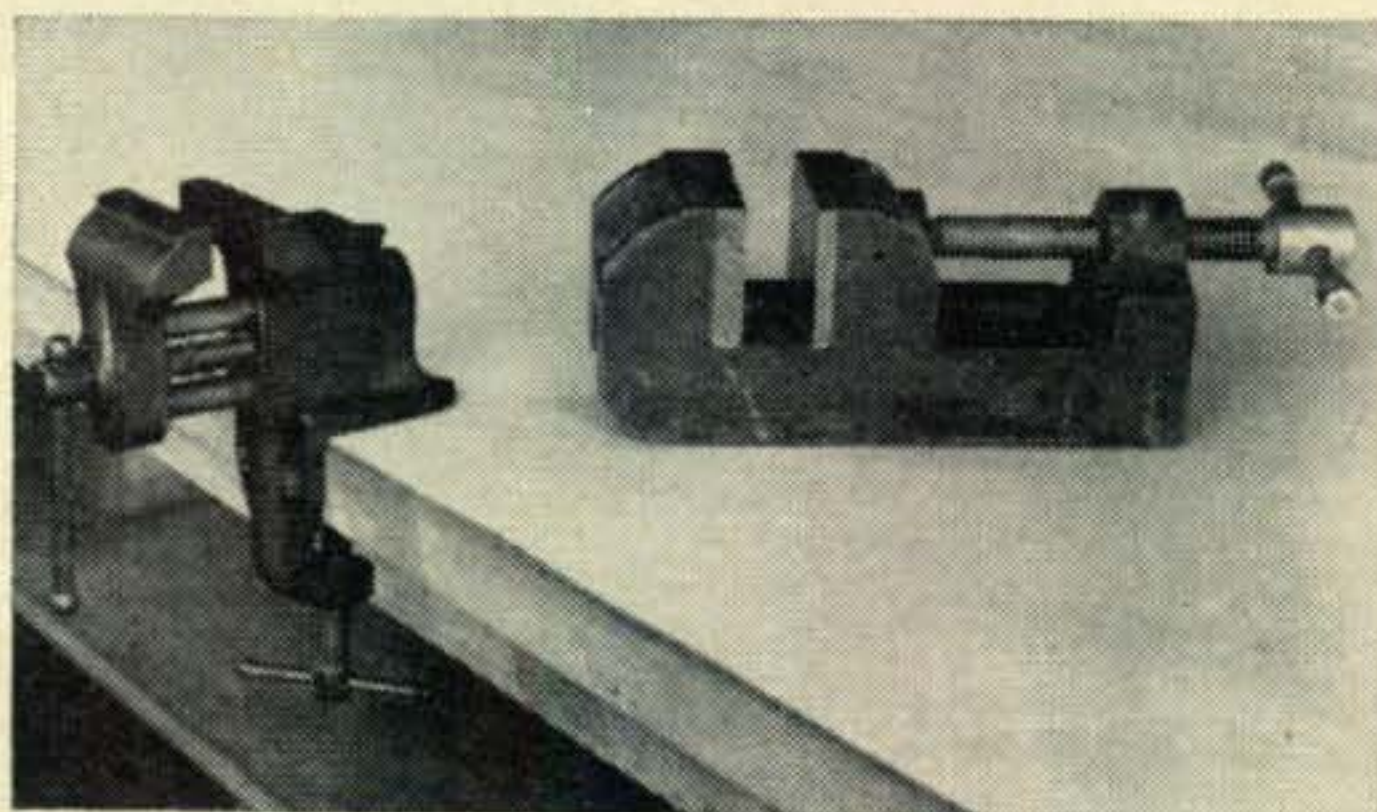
Portable clamp-on vise is shown at the left with table-top or drill-press vise on the right.
